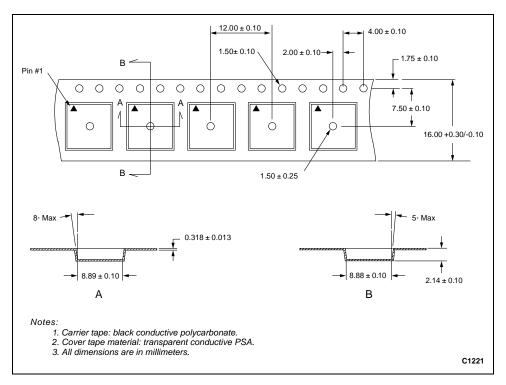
CX65101 8-Pin LCC Tape and Reel Dimensions
